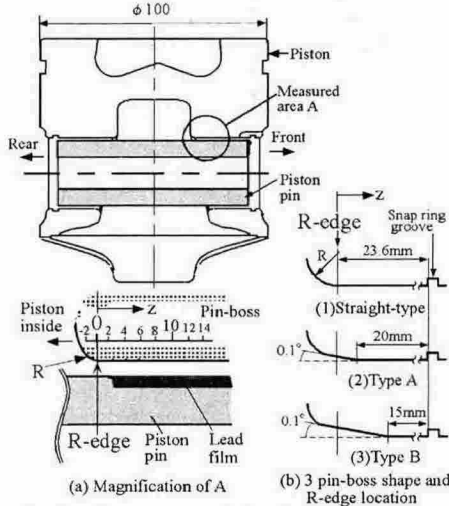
Measurement point in piston pin axial direction and pin-boss shape of test piston
